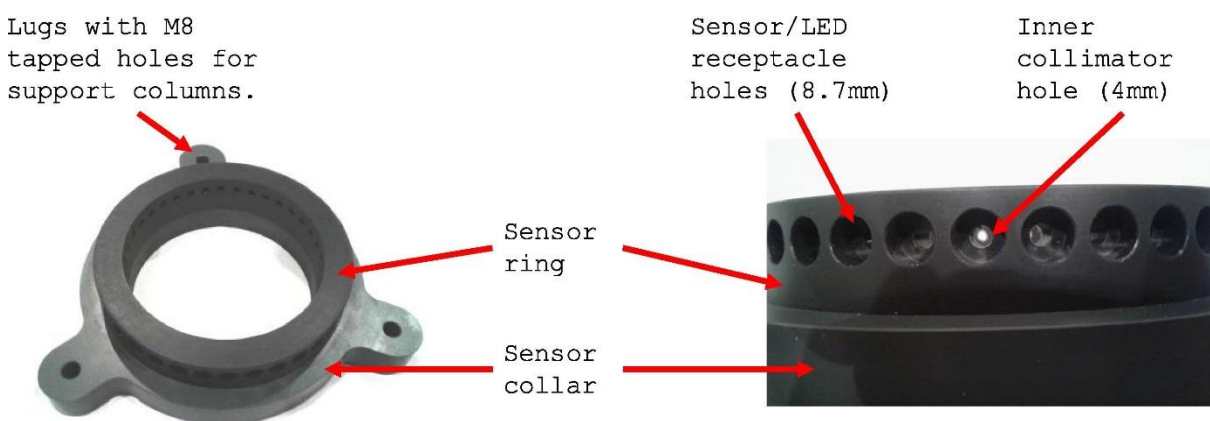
The sensor ring mounted in the sensor collar. The sensor/LED module receptacle holes (8.7mm diameter) are shown along with the concentric 4mm diameter inner collimator holes.
